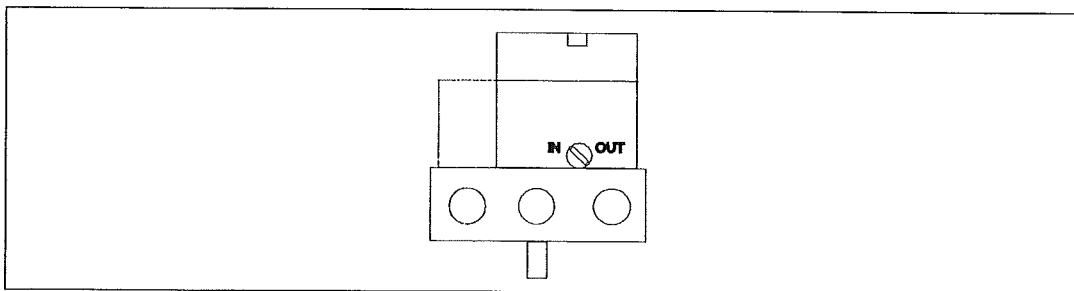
Purging air switch on the valve block, view of the positioner's pneumatic connections with open cover
